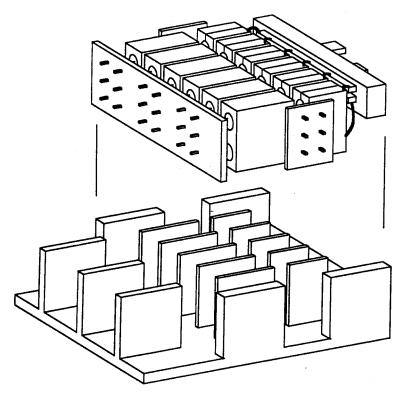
The terminal boards and output terminal block are installed using a fixture. Drop into the base casting, and fill with potting if desired.
